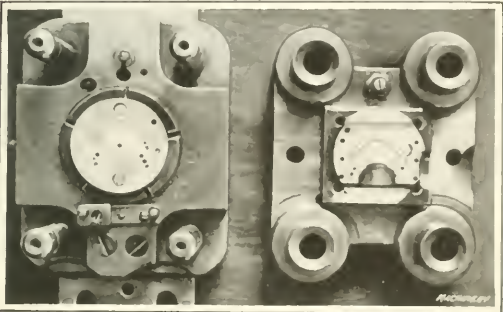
Diaphragm Wing Die that punches Metal 0.0025 Inch Thick
